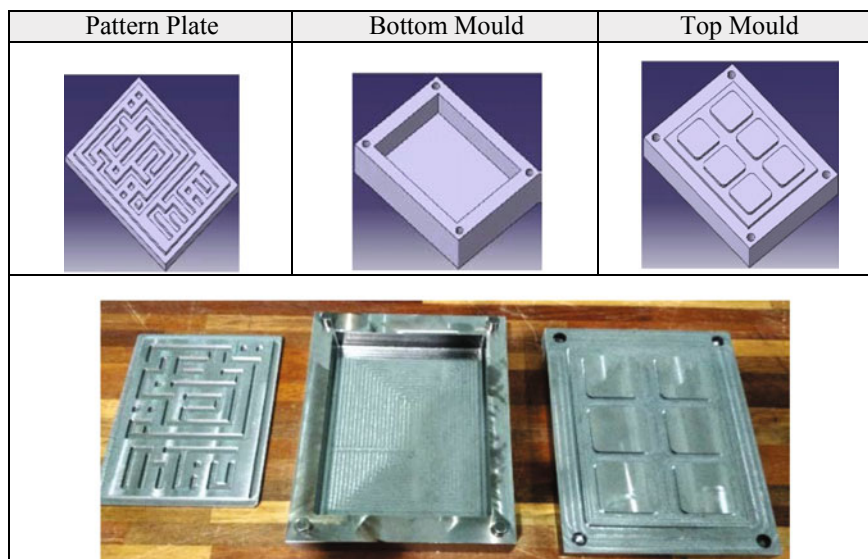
The moulds were designed using CAD and fabricated using a CNC milling machine
